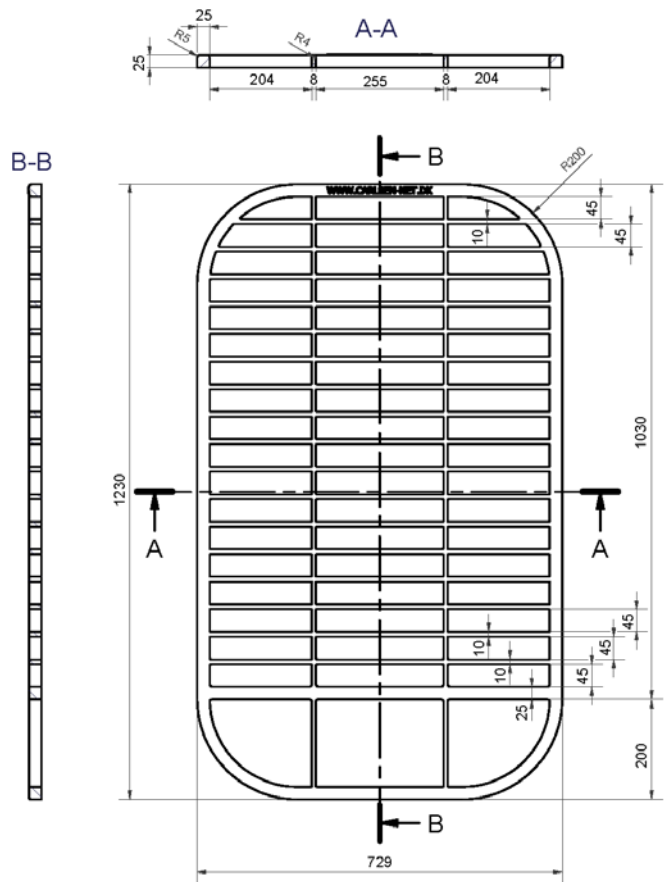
Technical drawings of the grids. Distances in millimeter. R indicates the center of a corner with the corner radius in millimeters.
